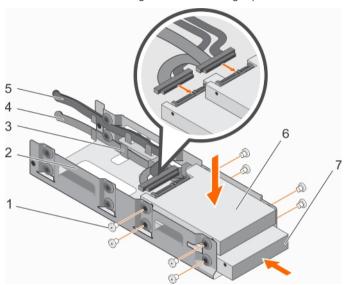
Installing a 2.5 inch cabled hard drive (hard drive 2/C and hard drive 3/D) from the hard drive cage
